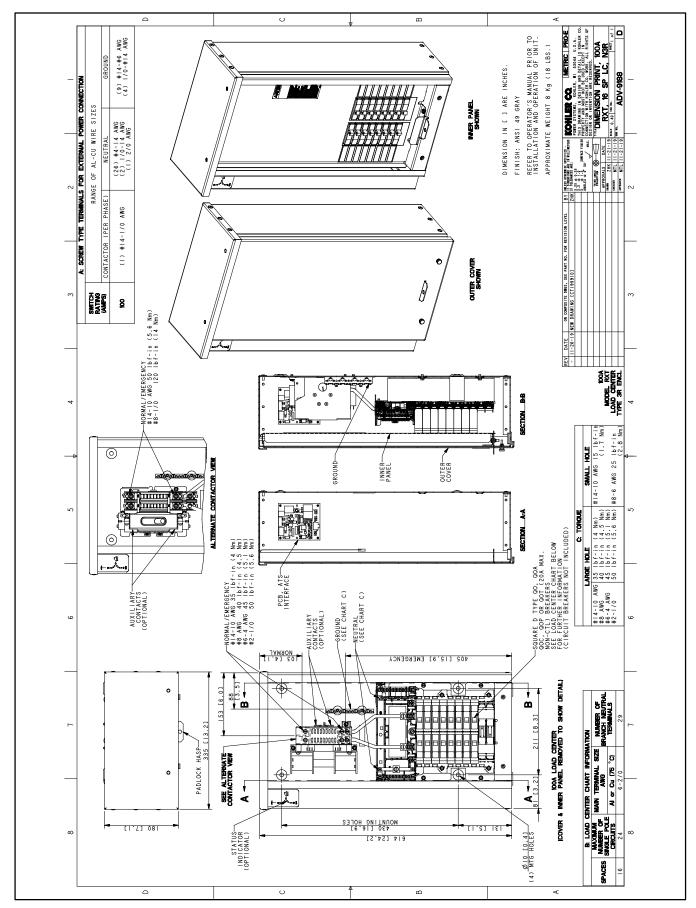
Enclosure Dimensions, 100 Amp Single-Phase with Load Center, ADV-9188
